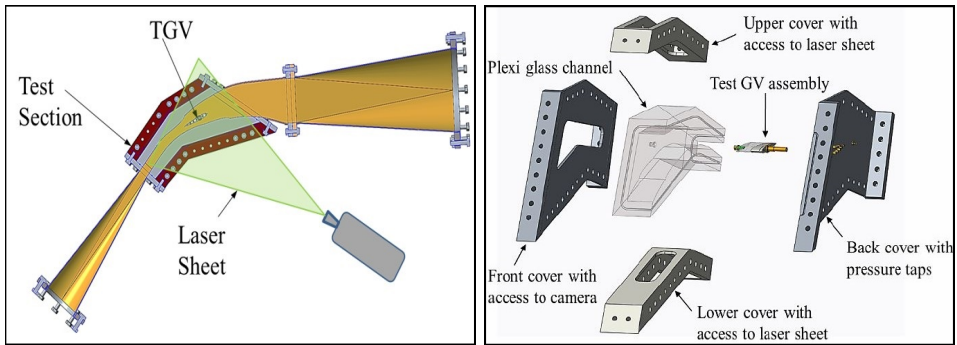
Test rig and exploded view of test section [Thapa, 2015]
